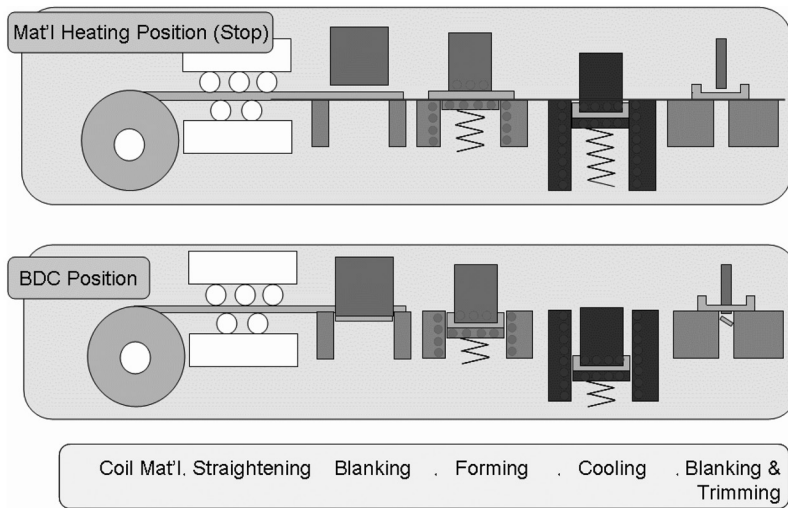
Magnesium forming production line. BDC, bottom dead center. Courtesy of Aida Engineering Ltd., Japan
